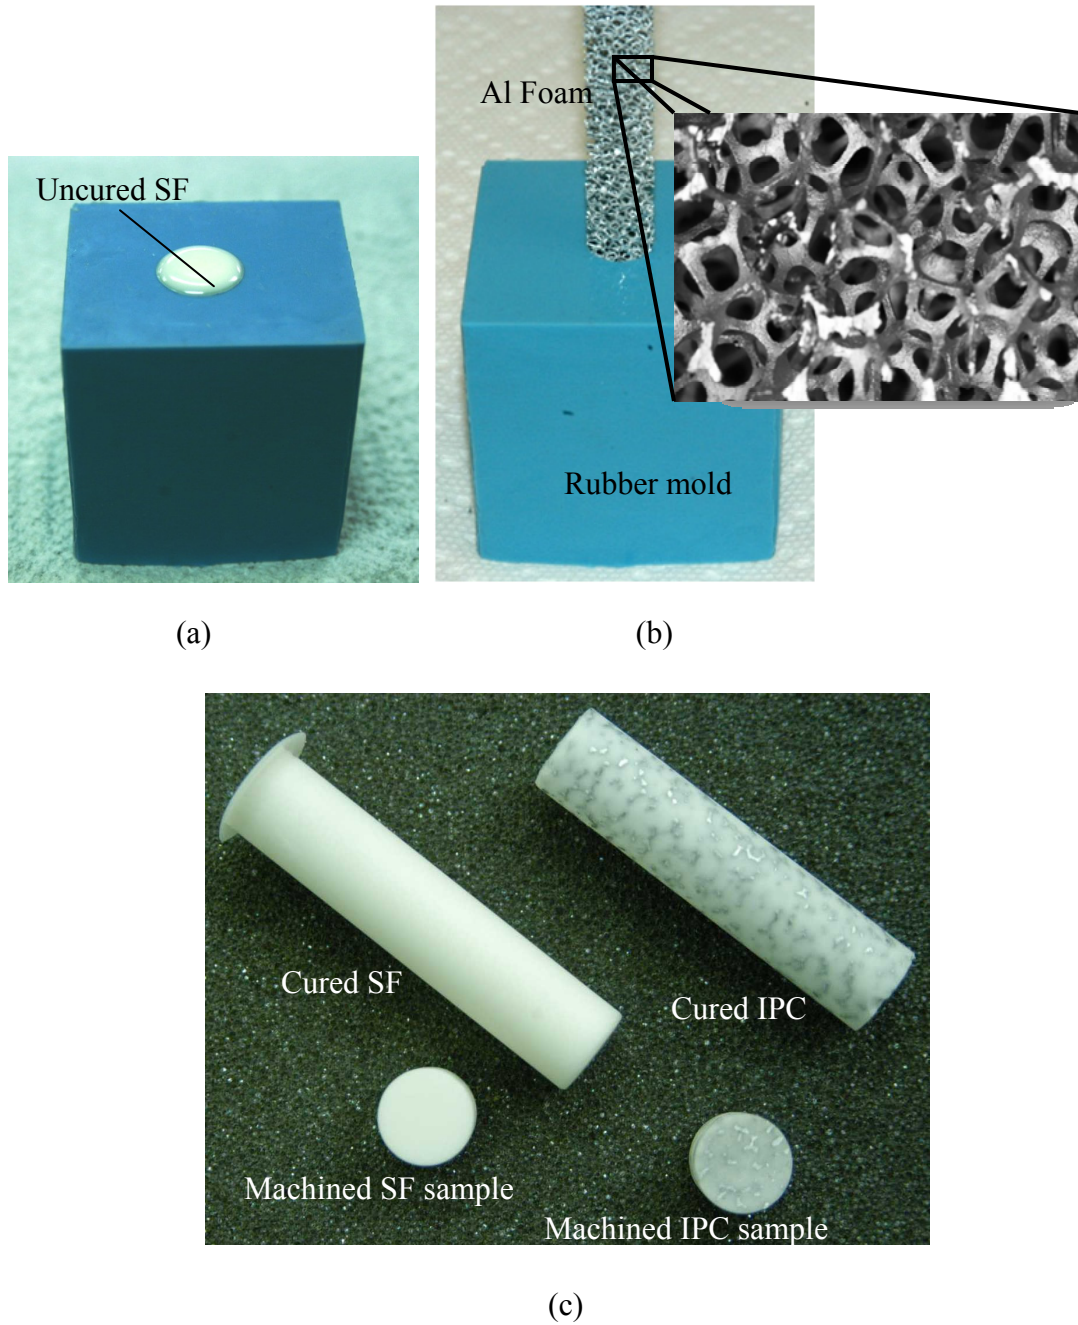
(a) Rubber mold with uncured SF, (b) Aluminum foam inserted into mold containing uncured SF, (c) Cast and machined SF and IPC samples
